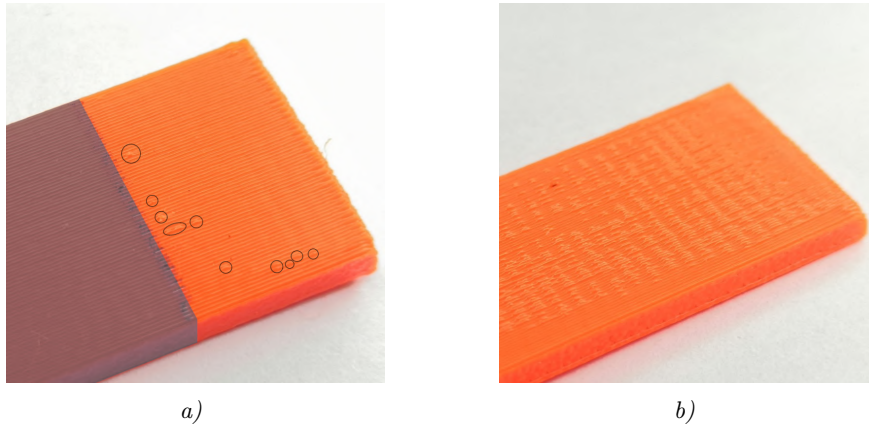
Appearance of out of plane protrusions between samples on surface A a) and B b)
